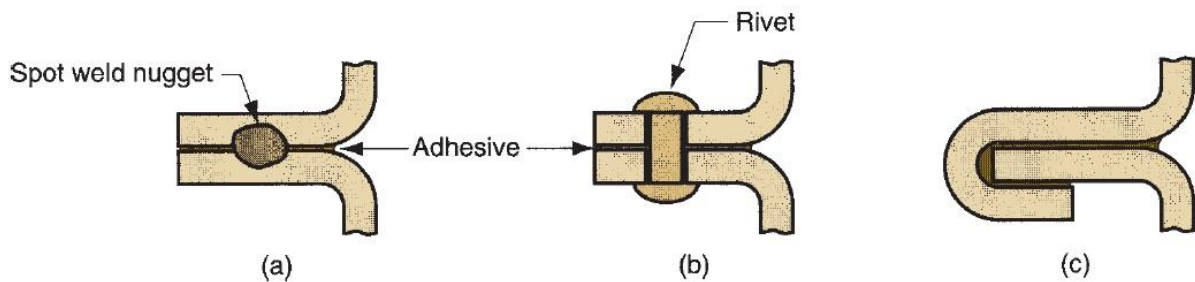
Adhesive bonding combined with other joining methods: (a) weldbonding—spot welded and adhesive bonded; (b) riveted (or bolted) and adhesive bonded; and (c) formed plus adhesive bonded.
